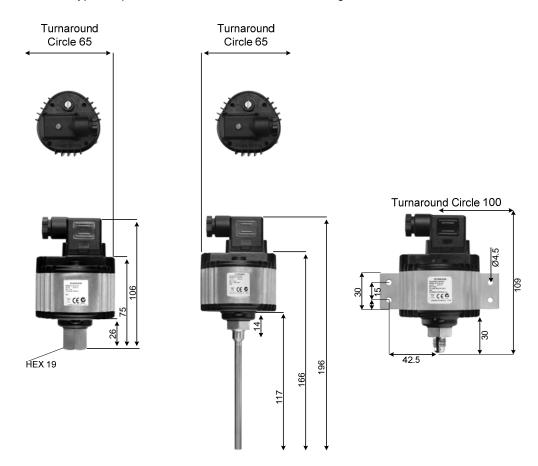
Pressure Connection Types: Style 47 (Left), Style 28 (Middle), Style 5 (Right), Dimensions, mm
